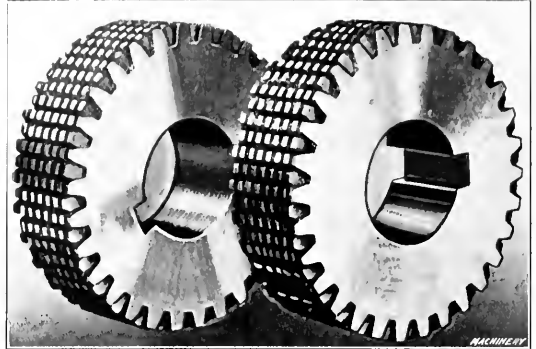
Laminated Gears formed of Toothed Disks riveted together
